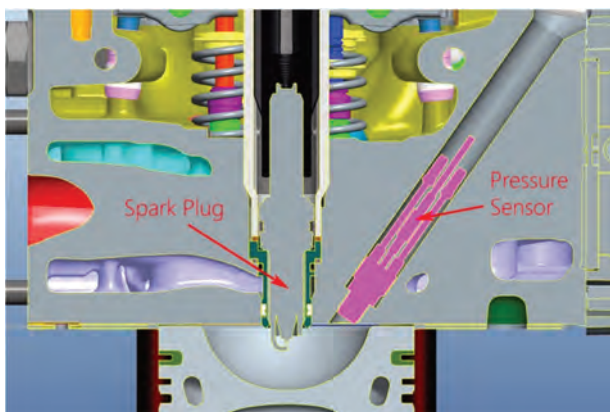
CAD visualisation of the combustion chamber of the spark plug engine
